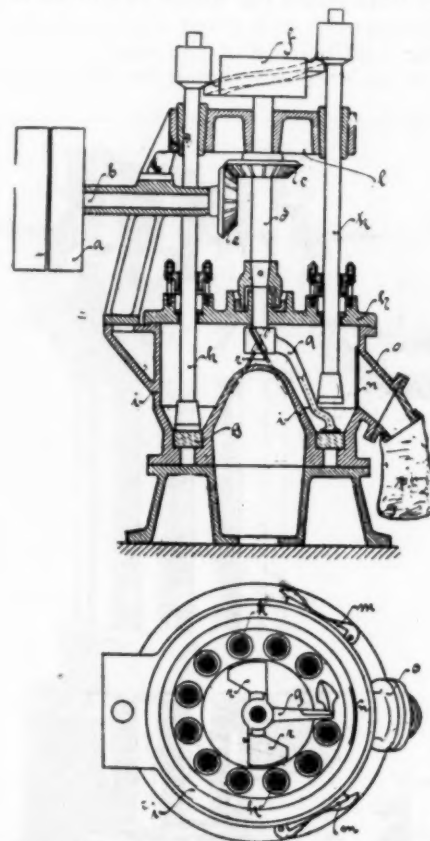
MEDIUM STAMP SECTION AND PLAN.
